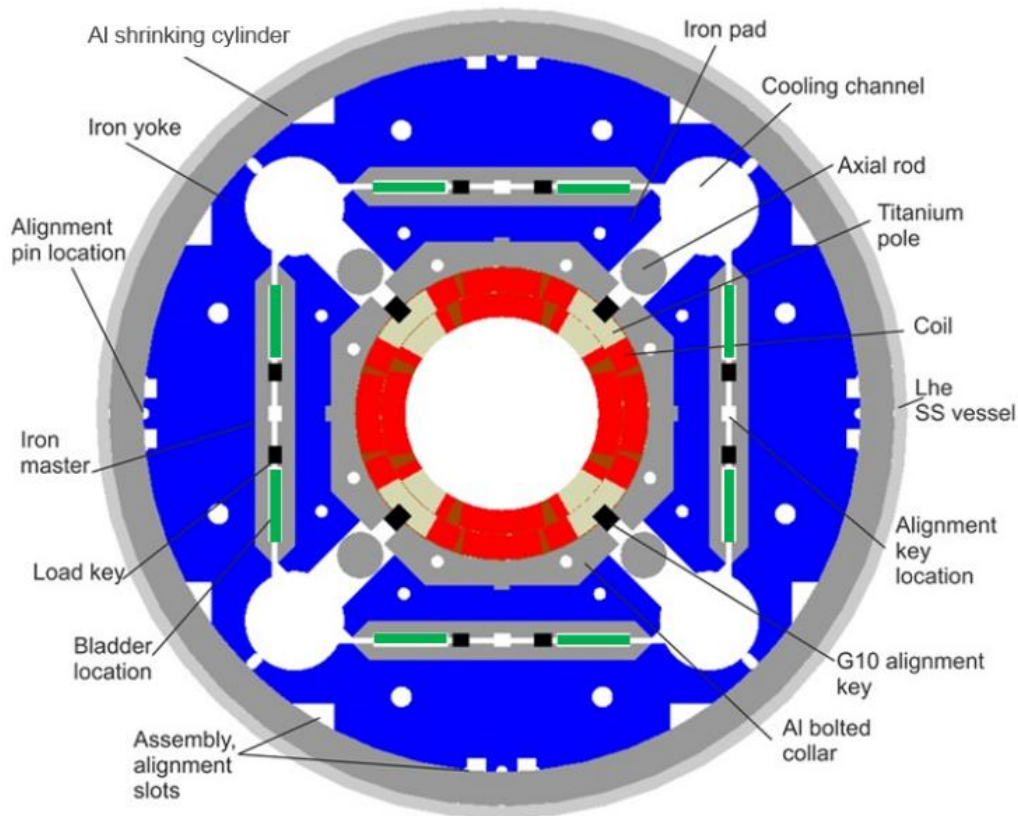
Cross-sectional view of 150-mm-aperture HL-LHC MQXF quadrupole magnet showing the double-layer, $\cos^2\theta$ coils (red) with separate poles (beige), surrounded by aluminum collar packs (grey), low-carbon steel pads and yoke (dark blue), aluminum shrinking cylinders (dark gray) and welded stainless steel outer shell (light grey). The original positions of the bladders are shown in green; they are replaced by keys shown in black.
